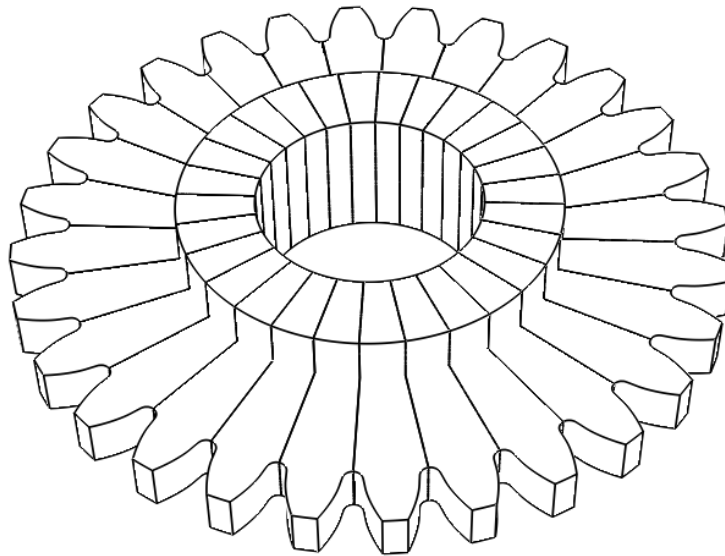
Gear geometry with 28 teeth: tip diameter 95mm; tooth thickness 6mm.
